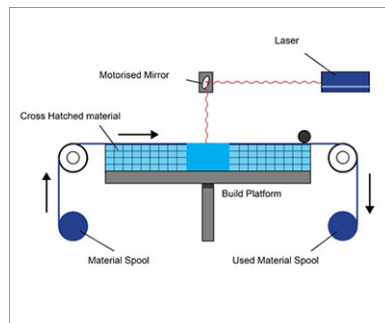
Sheet Lamination (About Additive Manufacturing)
